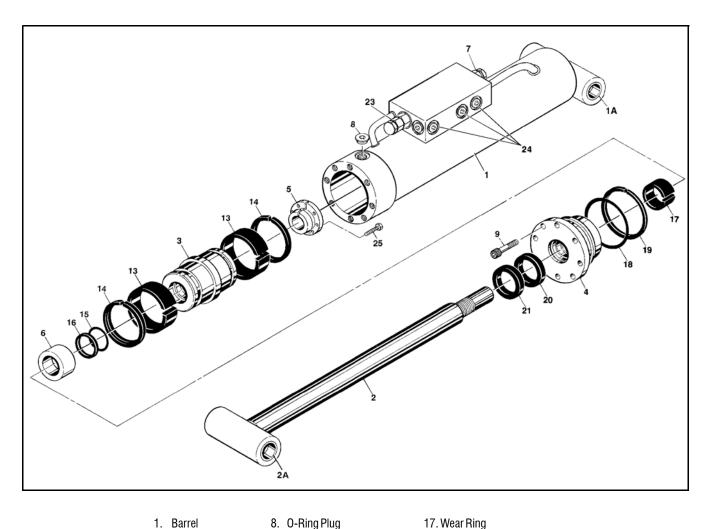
600S Axle Lockout Cylinder (Prior to S/N 75606)
